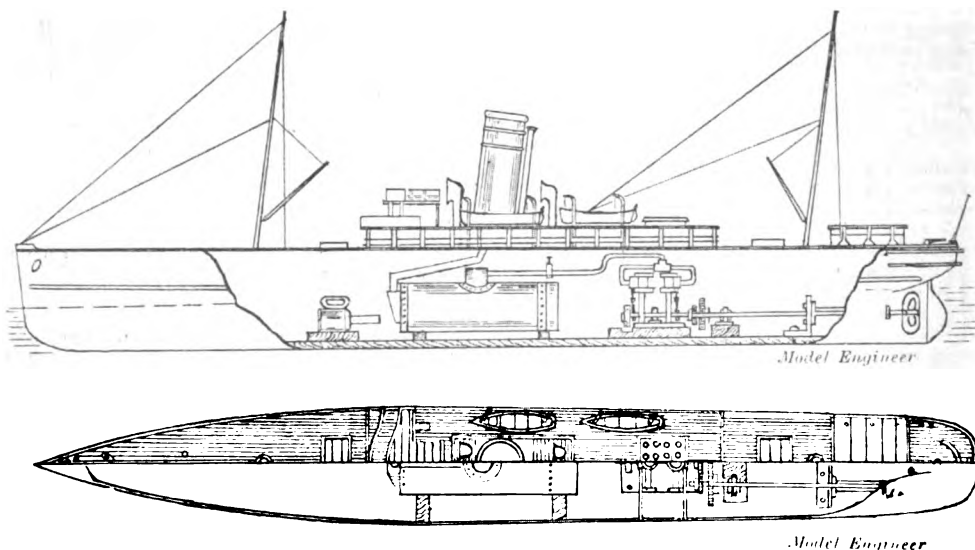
LONGITUDINAL SECTION AND PLANS OF MODEL TWIN SCREW STEAMER.
